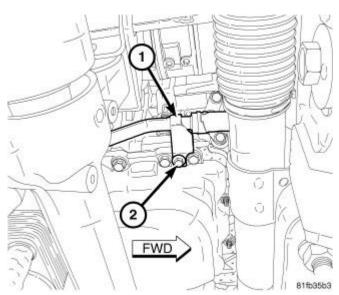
Oil Cooler Line & Bolt Courtesy of CHRYSLER LLC
